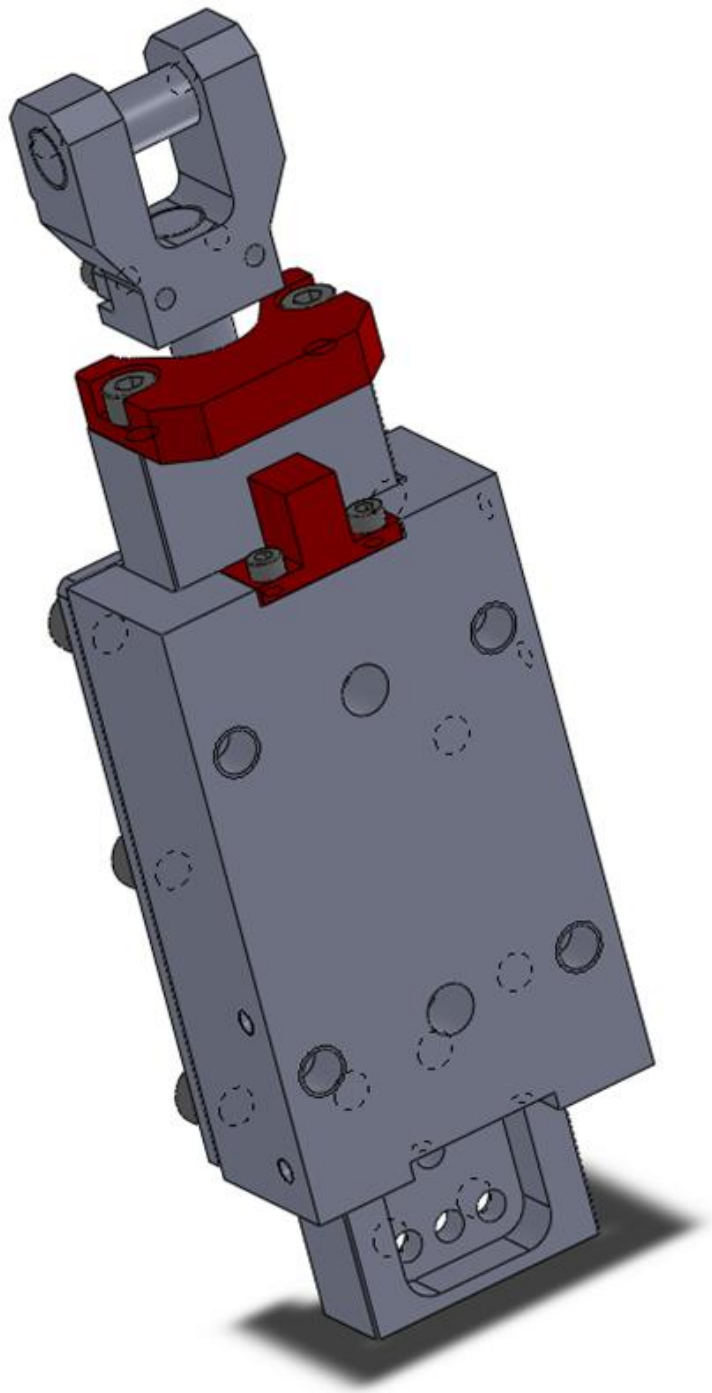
SPONSOR'S MECHANISM ASSEMBLY FRONT VIEW.
